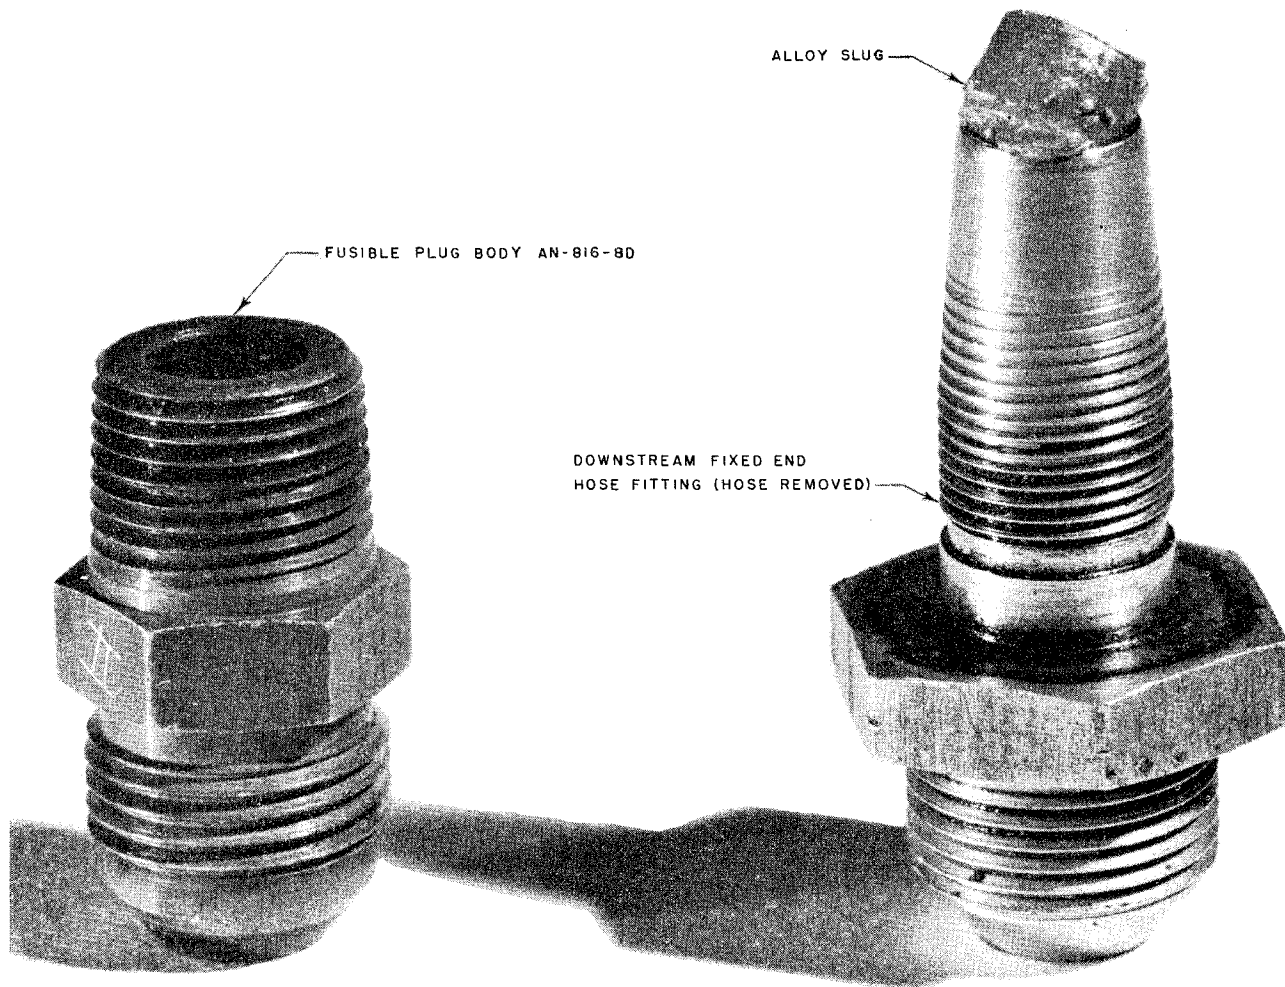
Failure Due to Limited Clearance Between Slug and Overboard Drain Line End Fitting
